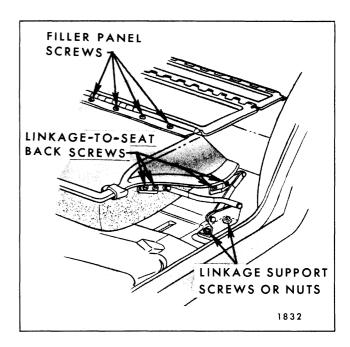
Folding Second Seat Back Linkage and Filler Panel
